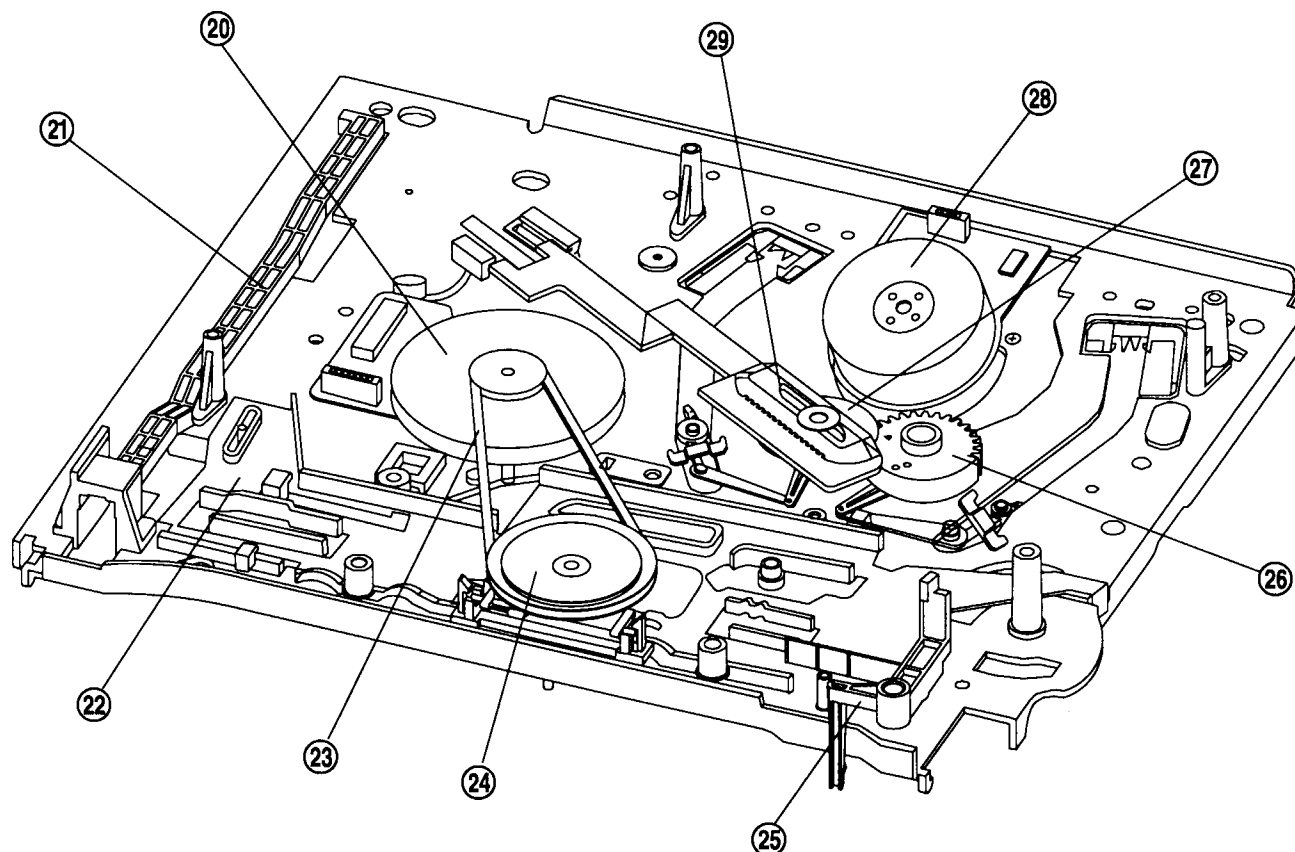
Tape Transport Mechanism Identification - Bottom View
